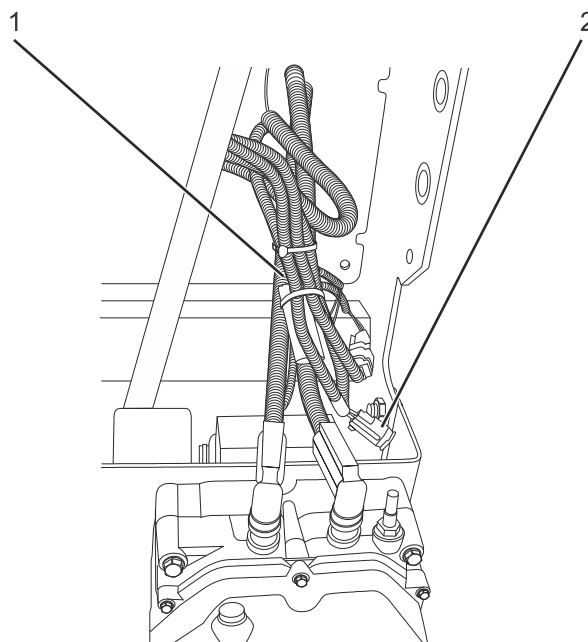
Diesel Exhaust Fluid (DEF) Pressure Line and Coolant Lines.
